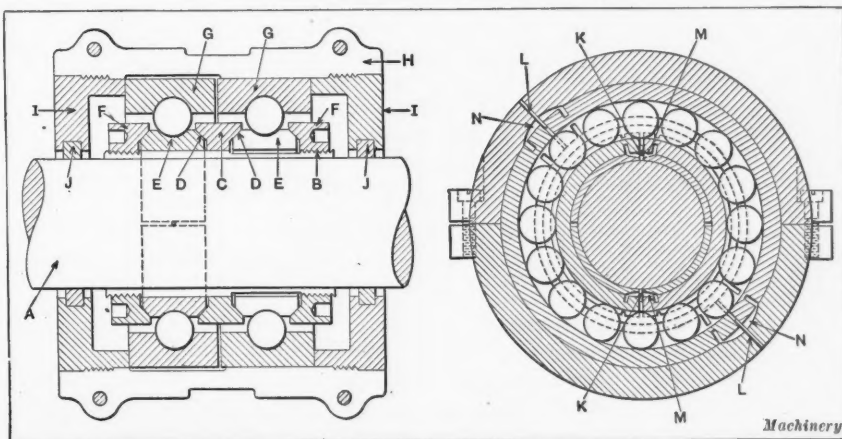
Longitudinal and Cross-sectional Views of Robson & Sorensen Two-part Ball Bearing
